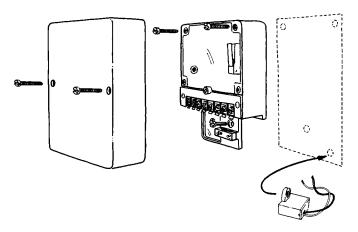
MOUNTING DETECTOR ON A STEEL SURFACE
